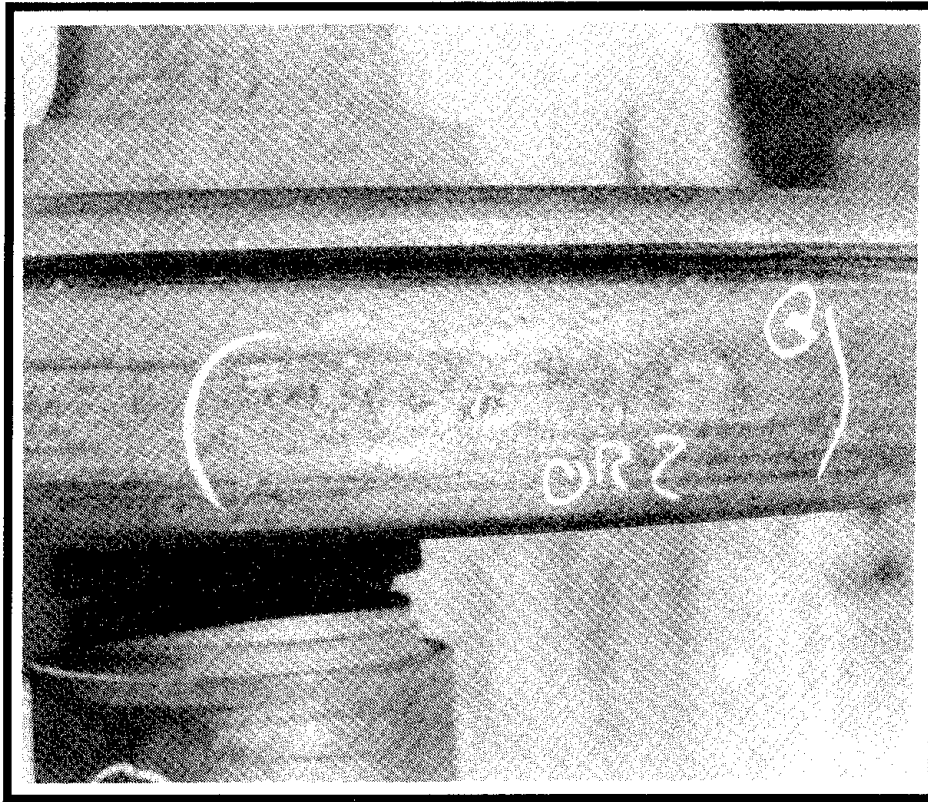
Slid Flat Wheel Tread Defect -- Left Wheel
